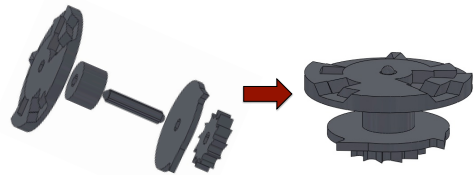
Re-designing the custom gear and disk component into multiple parts allows for easier mass-production
